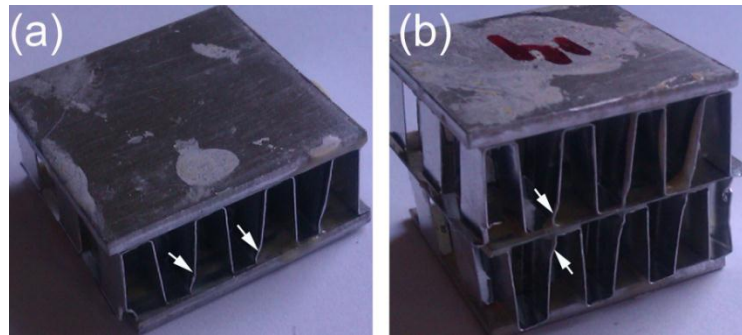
Imperfections on (a) single- and (b) double-layer corrugated sandwich samples.
